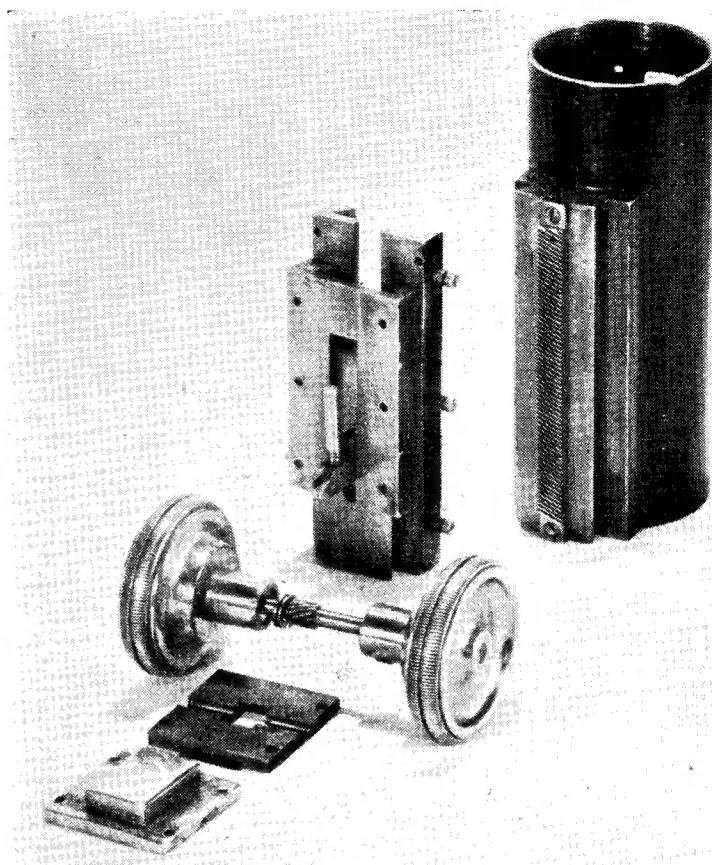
Exploded view of the body-tube assembly. The adjusting-screws for the gib strip are well shown. The smaller slide has similar screws on the opposite side
